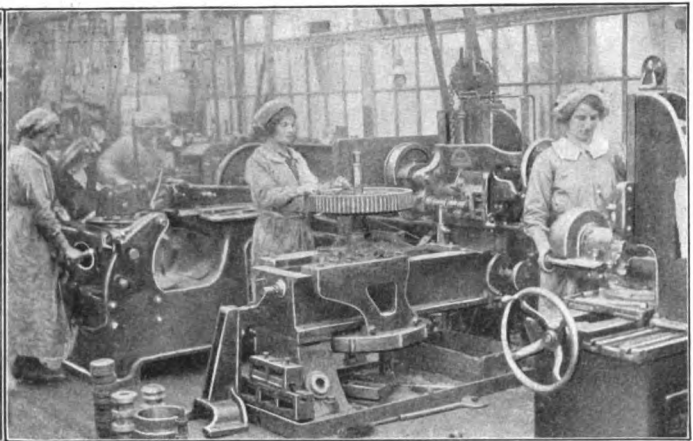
WOMEN IN THE GEAR-CUTTING DEPARTMENT—EACH OPERATOR ATTENDS TWO MACHINES
